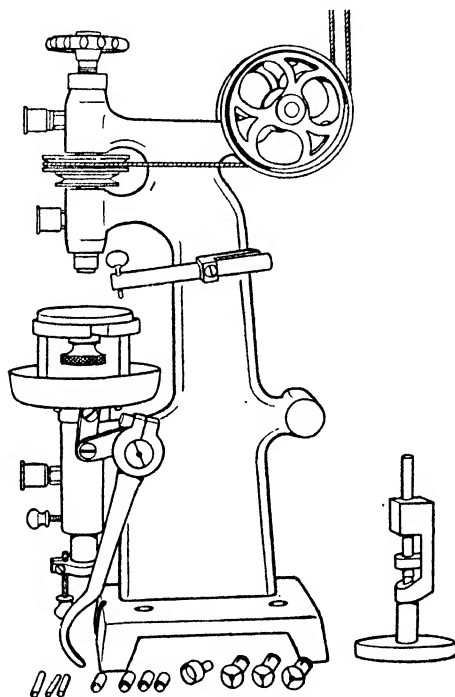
Swiss machine for the boring out of jewels from plates by means of tubes
